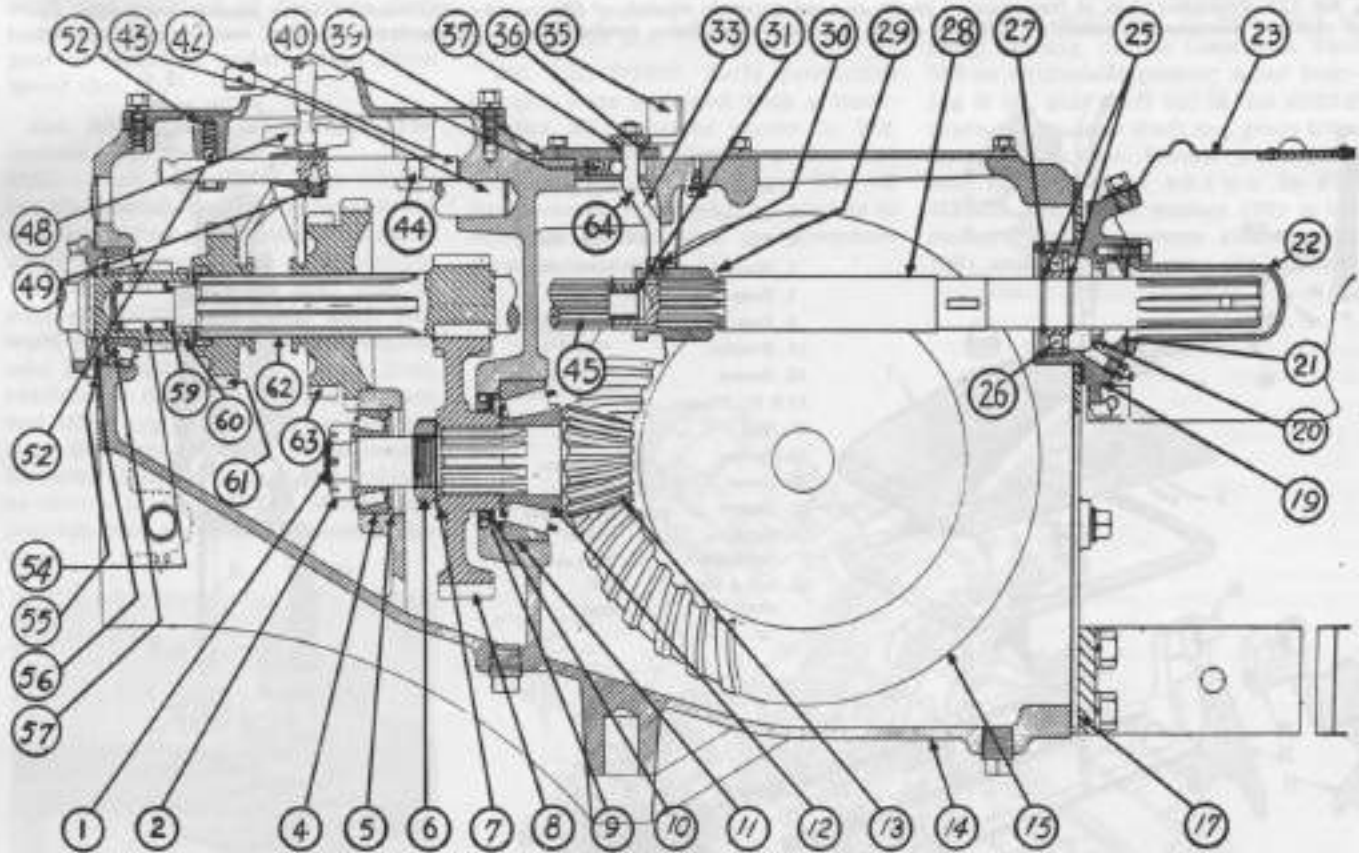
Transmission and differential assembly—Side view—Models 20, 20K, 22, 22K, 81 and 82.
